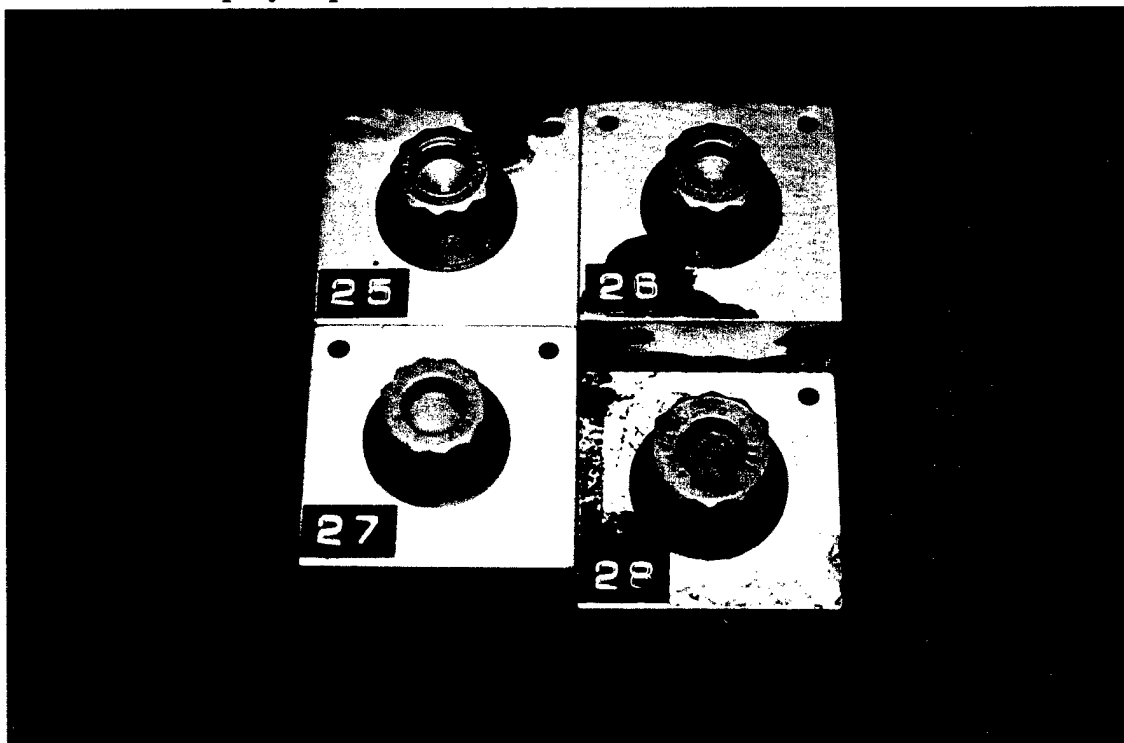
H11 Chromium Hot Work Tool Steel Bolt Heads With Antiseize Solid Film Lubricant (MoS_2) Before Salt Spray Exposure. Reduced 25%.
